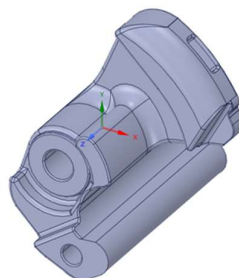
illustrates the three-dimensional CAD model of the Type E knuckle coupler.
